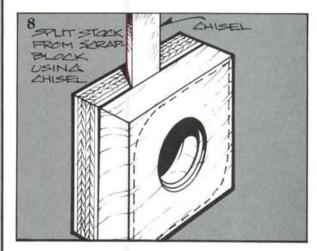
Remove the turning and split the scrap block off with a chisel, working the tool back and forth until the piece starts to separate.
